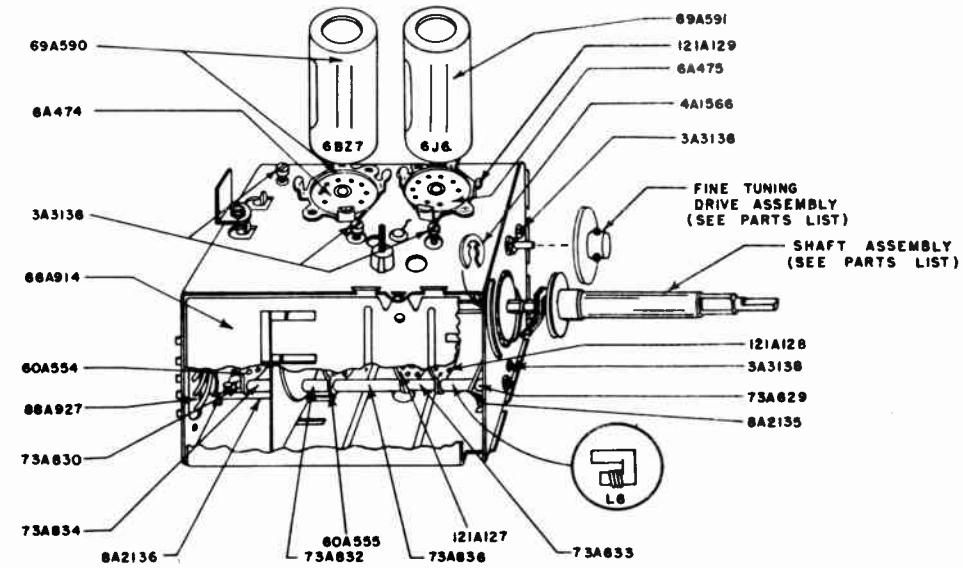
A. Parts Identification for 1C1717 Cascade Tuner
